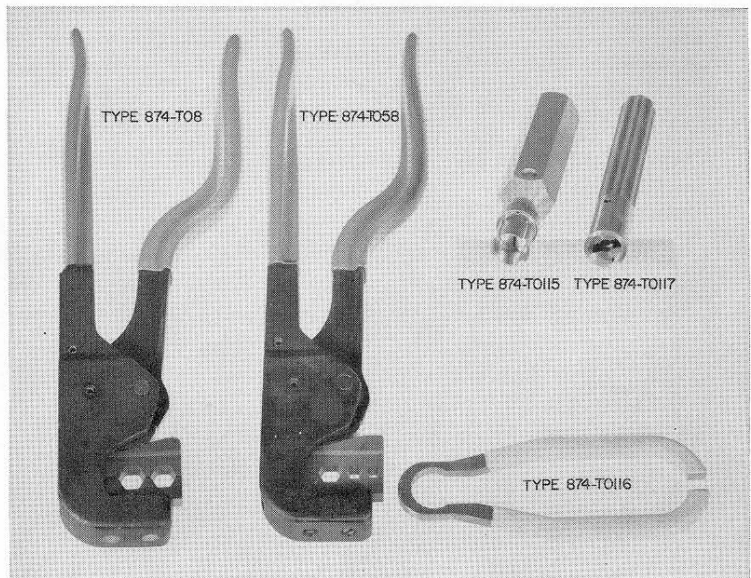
View of the assembly tools for assembly of Type 874 Coaxial Connectors. The three tools at the right, Types 874-T0115, 116, and 117, comprise the Type 874-TOK Tool Kit. The crimping tools are shown at the left.
